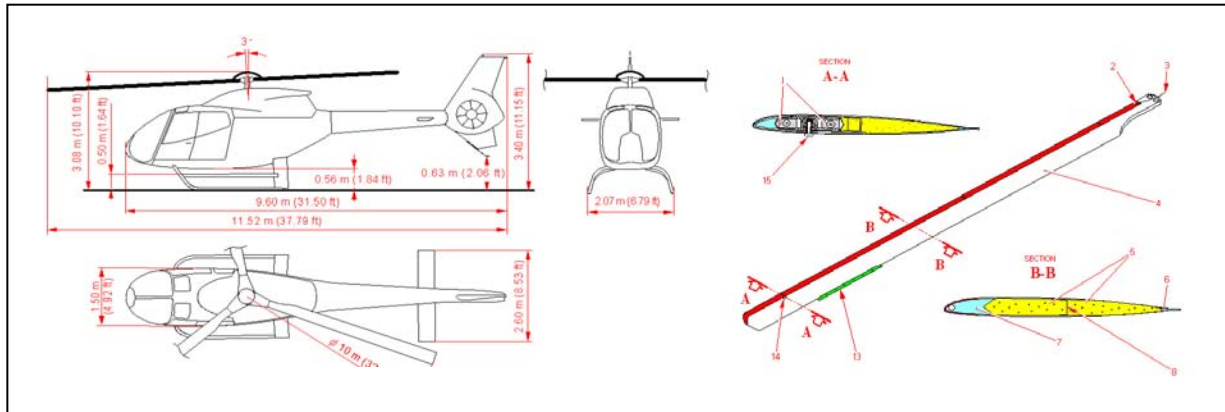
Dimensions of EUROCOPTER COLIBRI 120B and Main Rotor Blades
